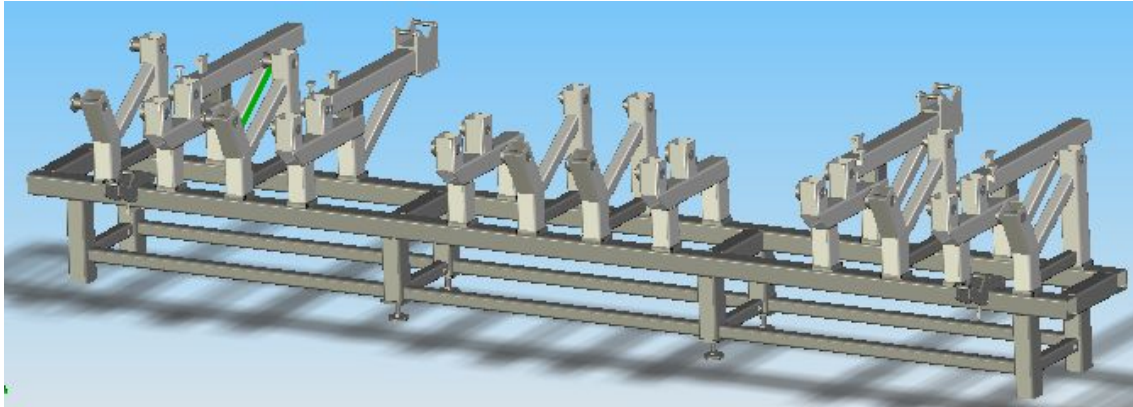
Schematic figure of welding jig for the machine with 8 and 12 lines with all the tools assembled
